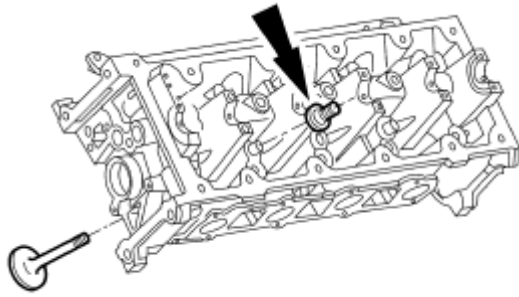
Locating Valve Spring Retainer Keys, Valve Spring Retainers, Valve Springs And Valves
